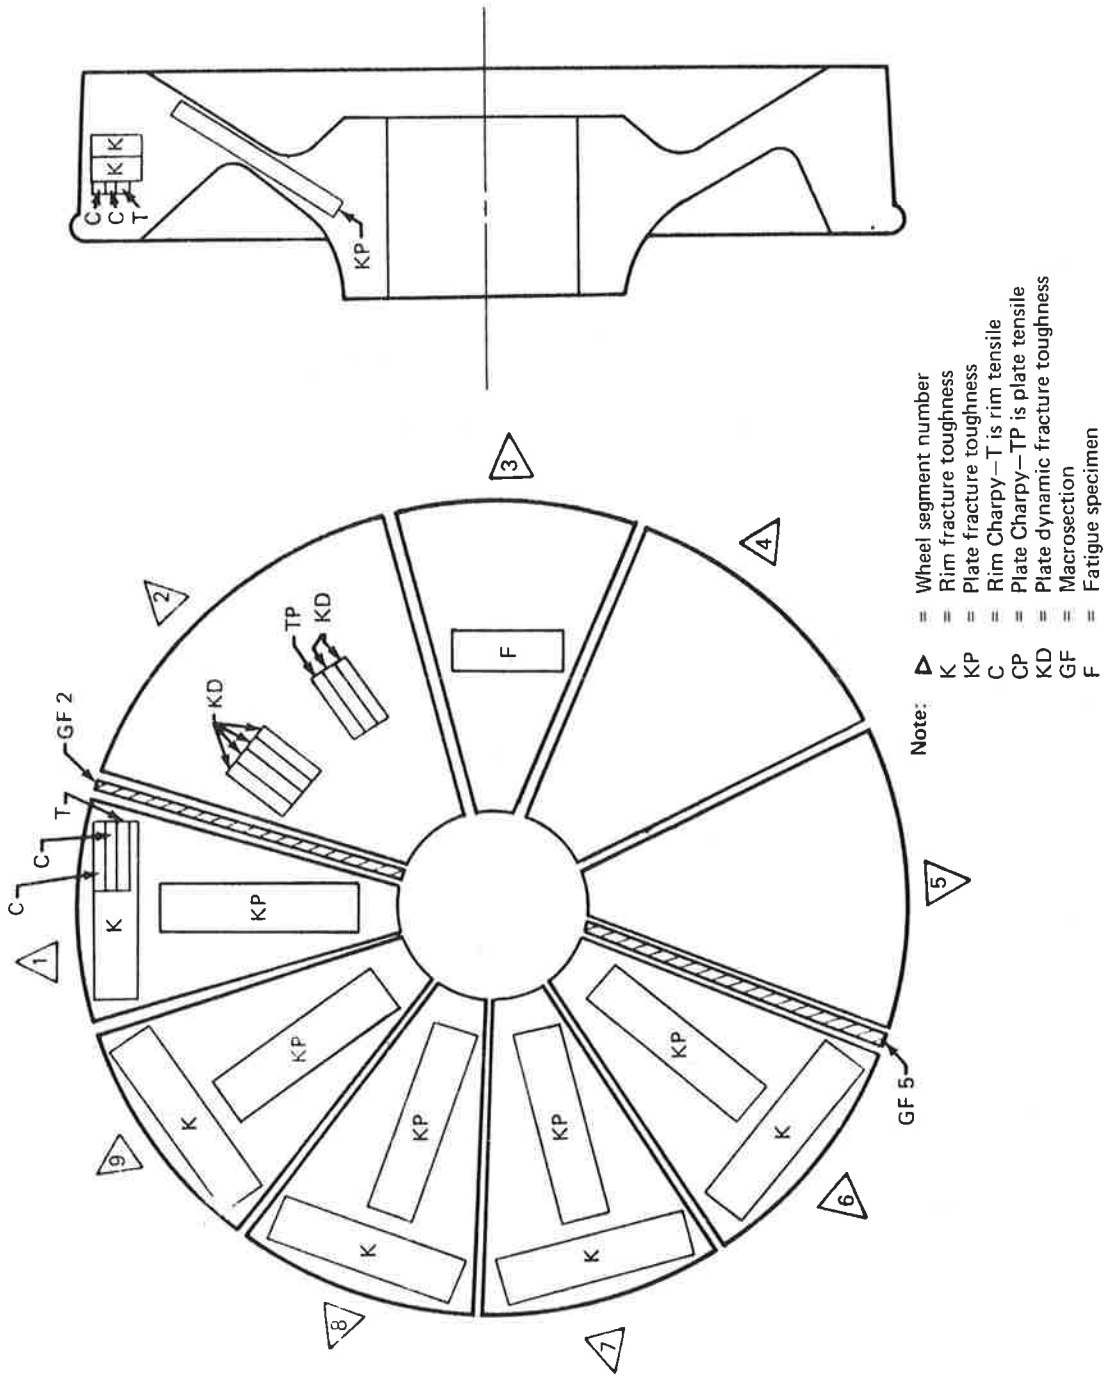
LOCATION OF SPECIMENS WITHIN WHEEL
